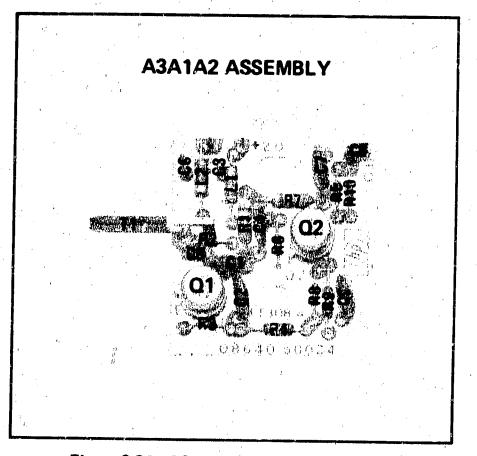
A3A1A2 Divider/Filter Buffer Amplifier Board Assembly
